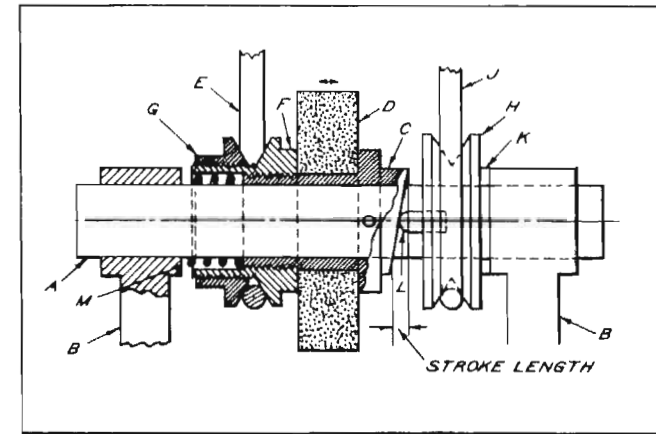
Slow reciprocation of grinding wheel *D* is obtained by an axial cam drive mechanism. Freely mounted pulley *H* must rotate at a different speed than the wheel-driving split pulley *F* and *G*.
